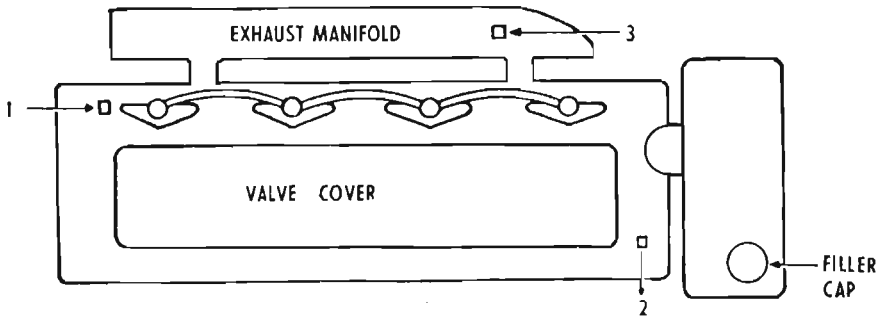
Coolant Bleeding Points on Earlier Engines.
